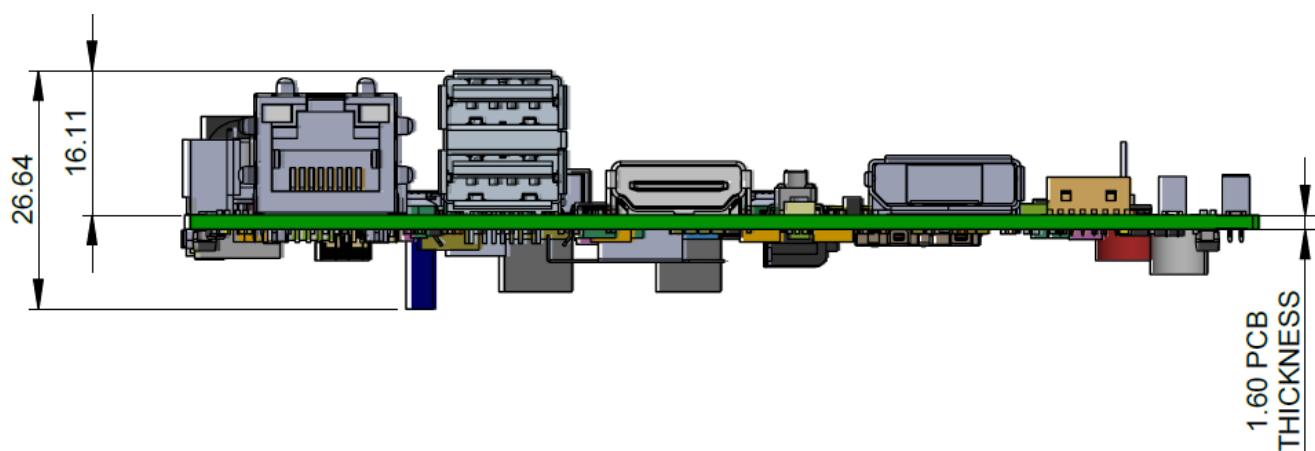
Mechanical dimensions of i.MX 8 QM/QP Qseven Carrier Board- Top View
